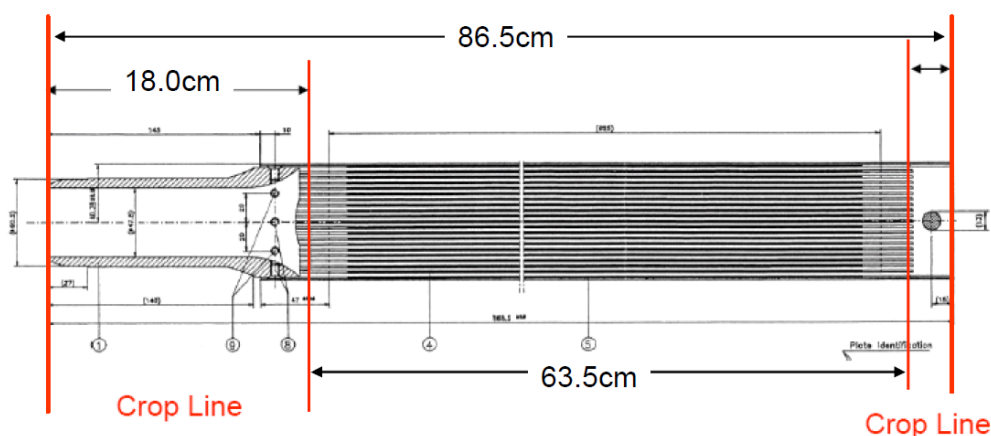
Dimensions of MTRE showing the cropped length (63.5 cm) for L Basin bundled fuel storage
